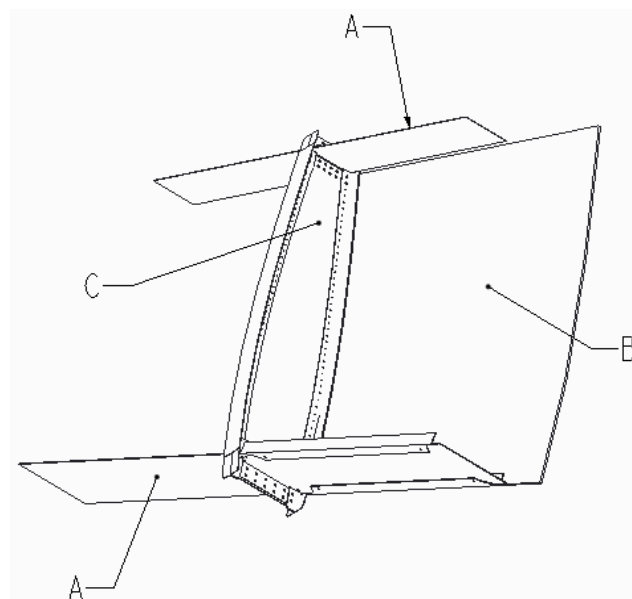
The Structure of a wing, illustrated from below, contains many plate components such as the wing spars (A), the skin plates (B) and the web plates of the wing ribs (C).
